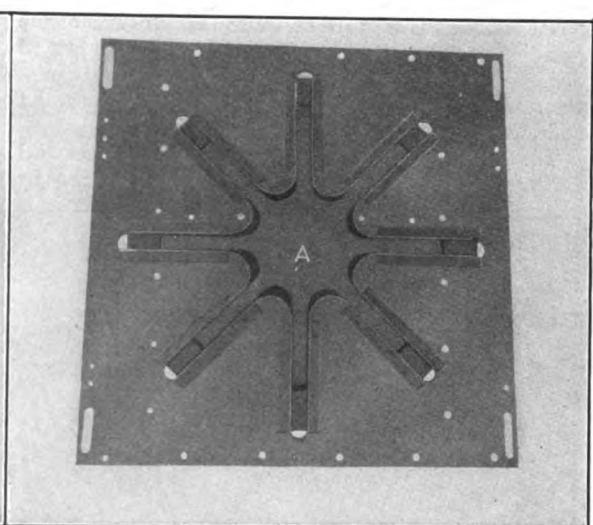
GRINDING FIXTURE FOR SECTIONS
